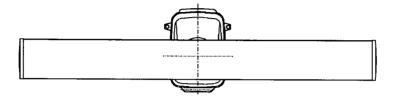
OUTLINE DRAWING OF SCANNER UNIT NKE-2062
